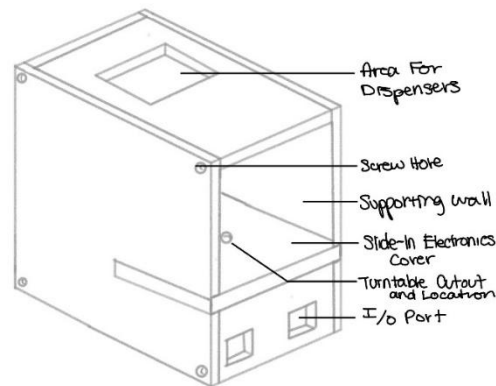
Example of possible acrylic product enclosure showing where accessory components would be located and how friction fitting, and screws would be implemented to assemble.
